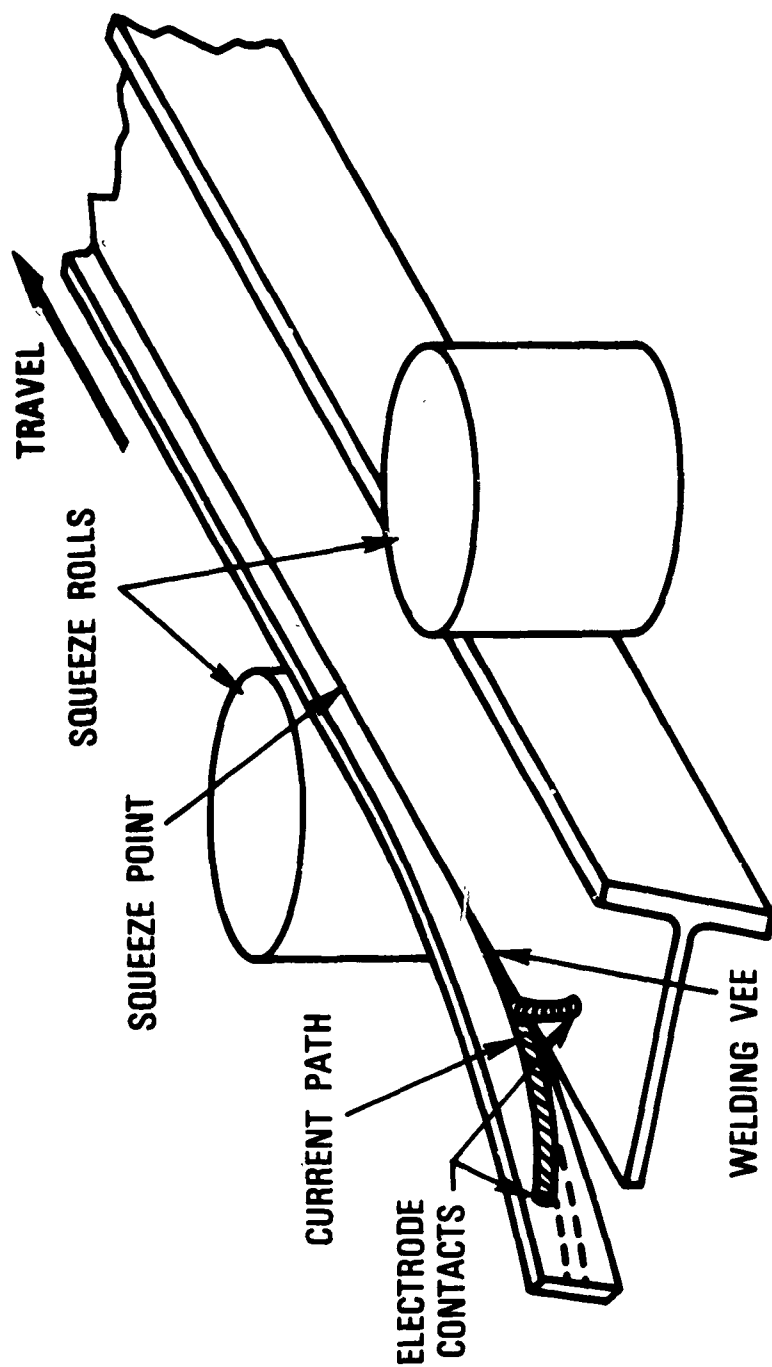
SCHEMATIC OF "T" STIFFENED PANEL BEING WELDED BY HFRW
